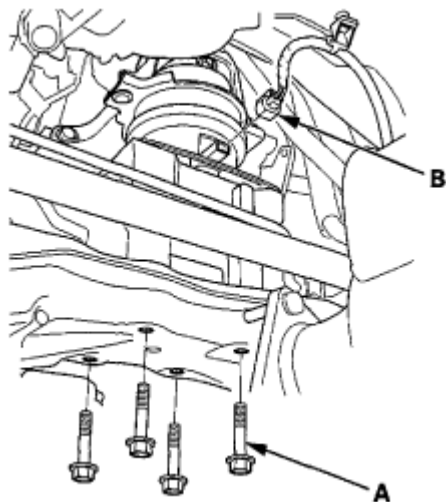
Identifying Rear Engine Mount Actuator Connector And Rear Engine Mount Base With Mounting Bolts
